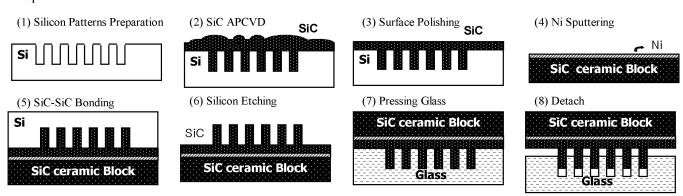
Experimental process of a SiC mold and glass press molding using the SiC mold.
